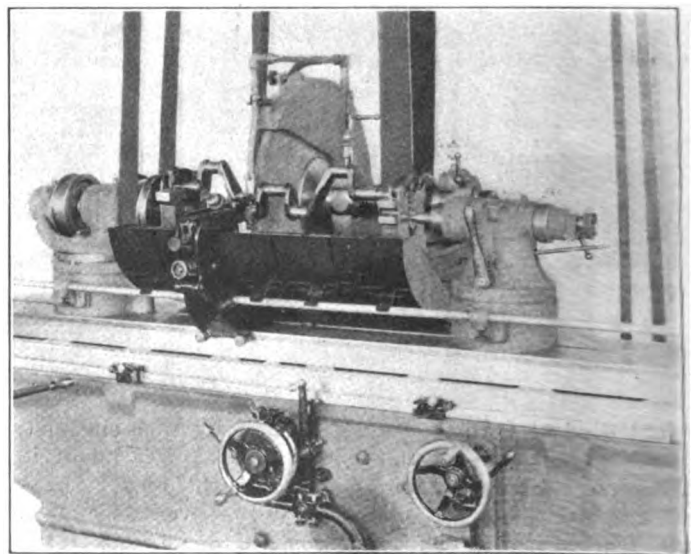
GRINDING CRANKSHAFT ON B. & S. NO. 4 MACHINE
